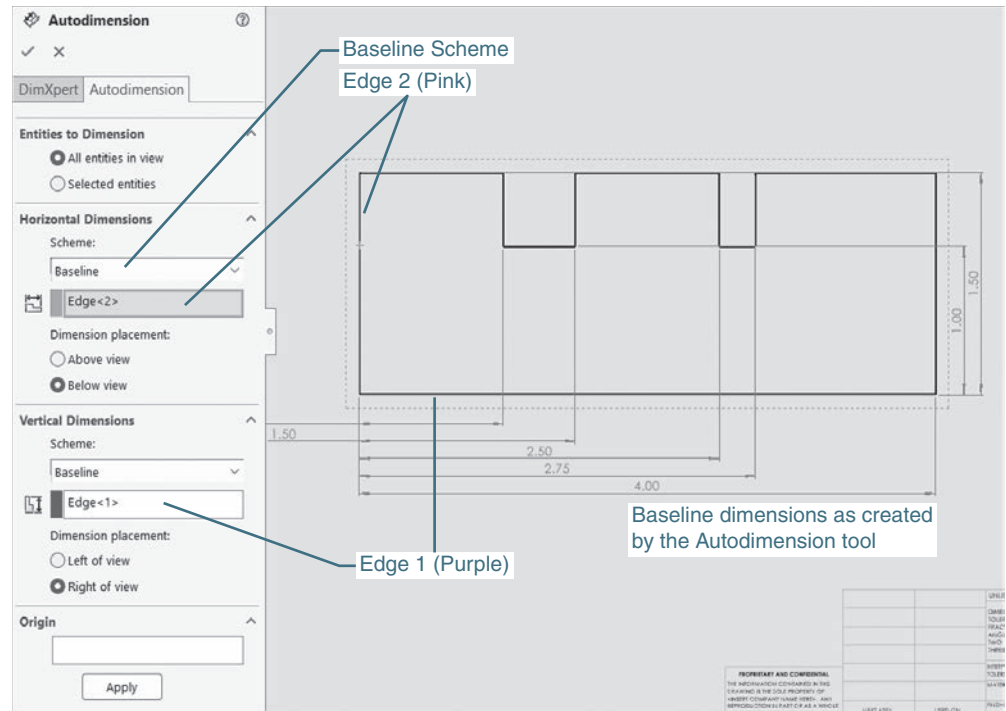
shows the shape shown in Figure 7-14 dimensioned using the baseline scheme, which is created as follows.
